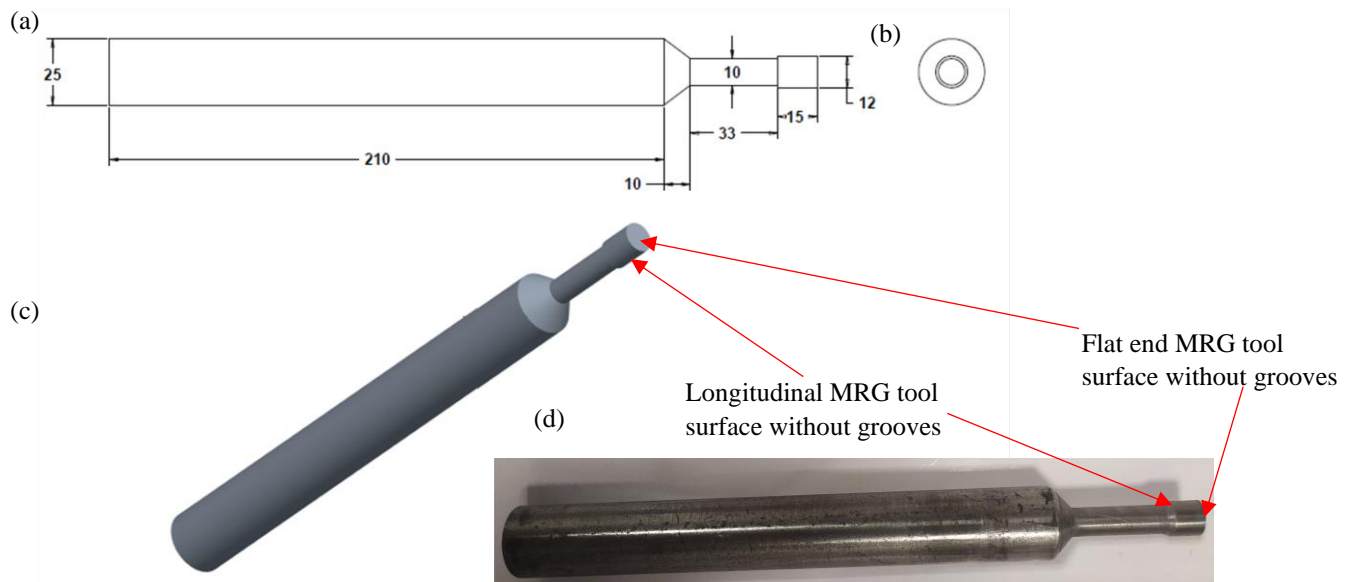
2D drawing of the (a) projected front view, (b) projected side view, (c) 3D CAD model, and (d) fabricated magnetorheological grinding tool without grooves.
